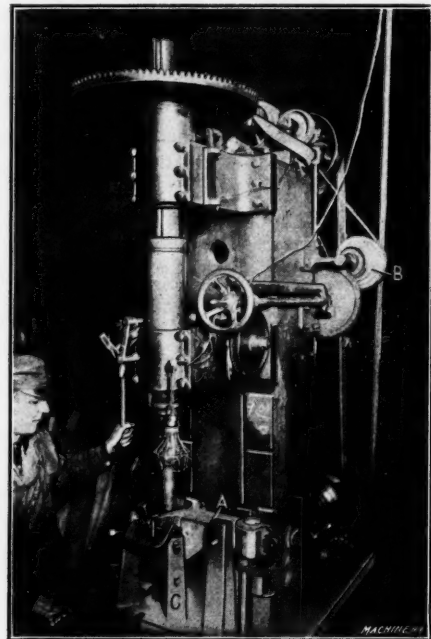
A Boring and Milling Machine set up for boring the Arm used in holding Drill Tables
